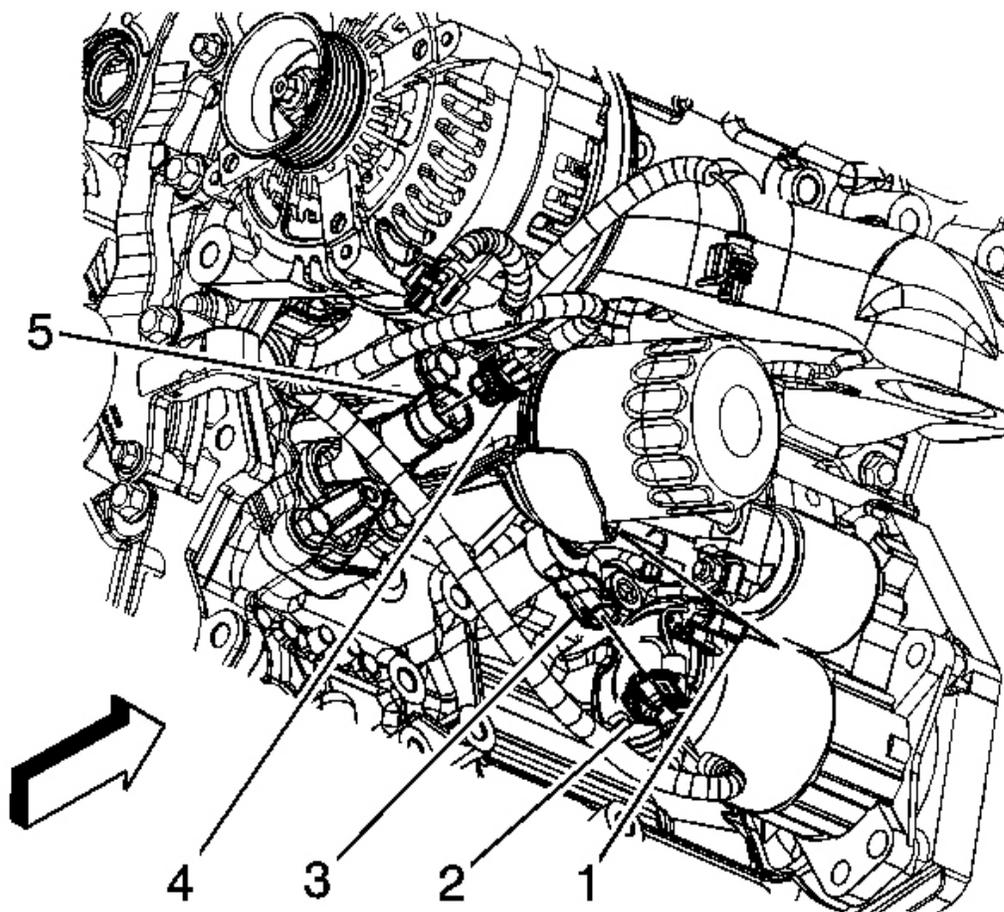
Identifying Starter Heat Shield Bolt & Shield
